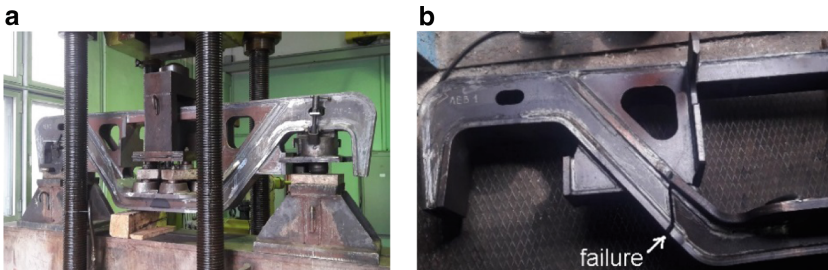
Prototype of side frame during accelerated fatigue test (a) and failure in the weld zone (b)
